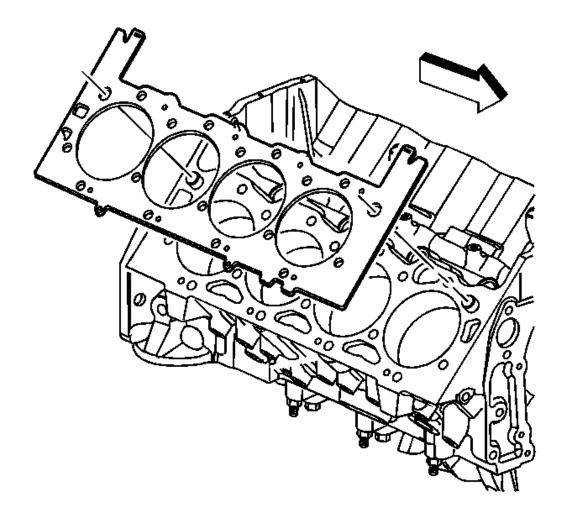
View Of Right Cylinder Head Gasket And Alignment Pins Courtesy of GENERAL MOTORS CORP.
